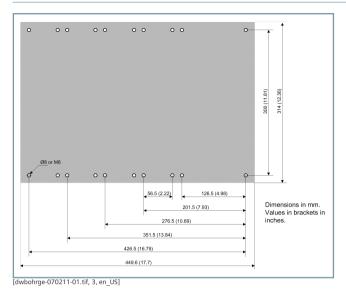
/27 Drilling Pattern of a 1/1 Surface-Mounted Device – 1st Device Row
